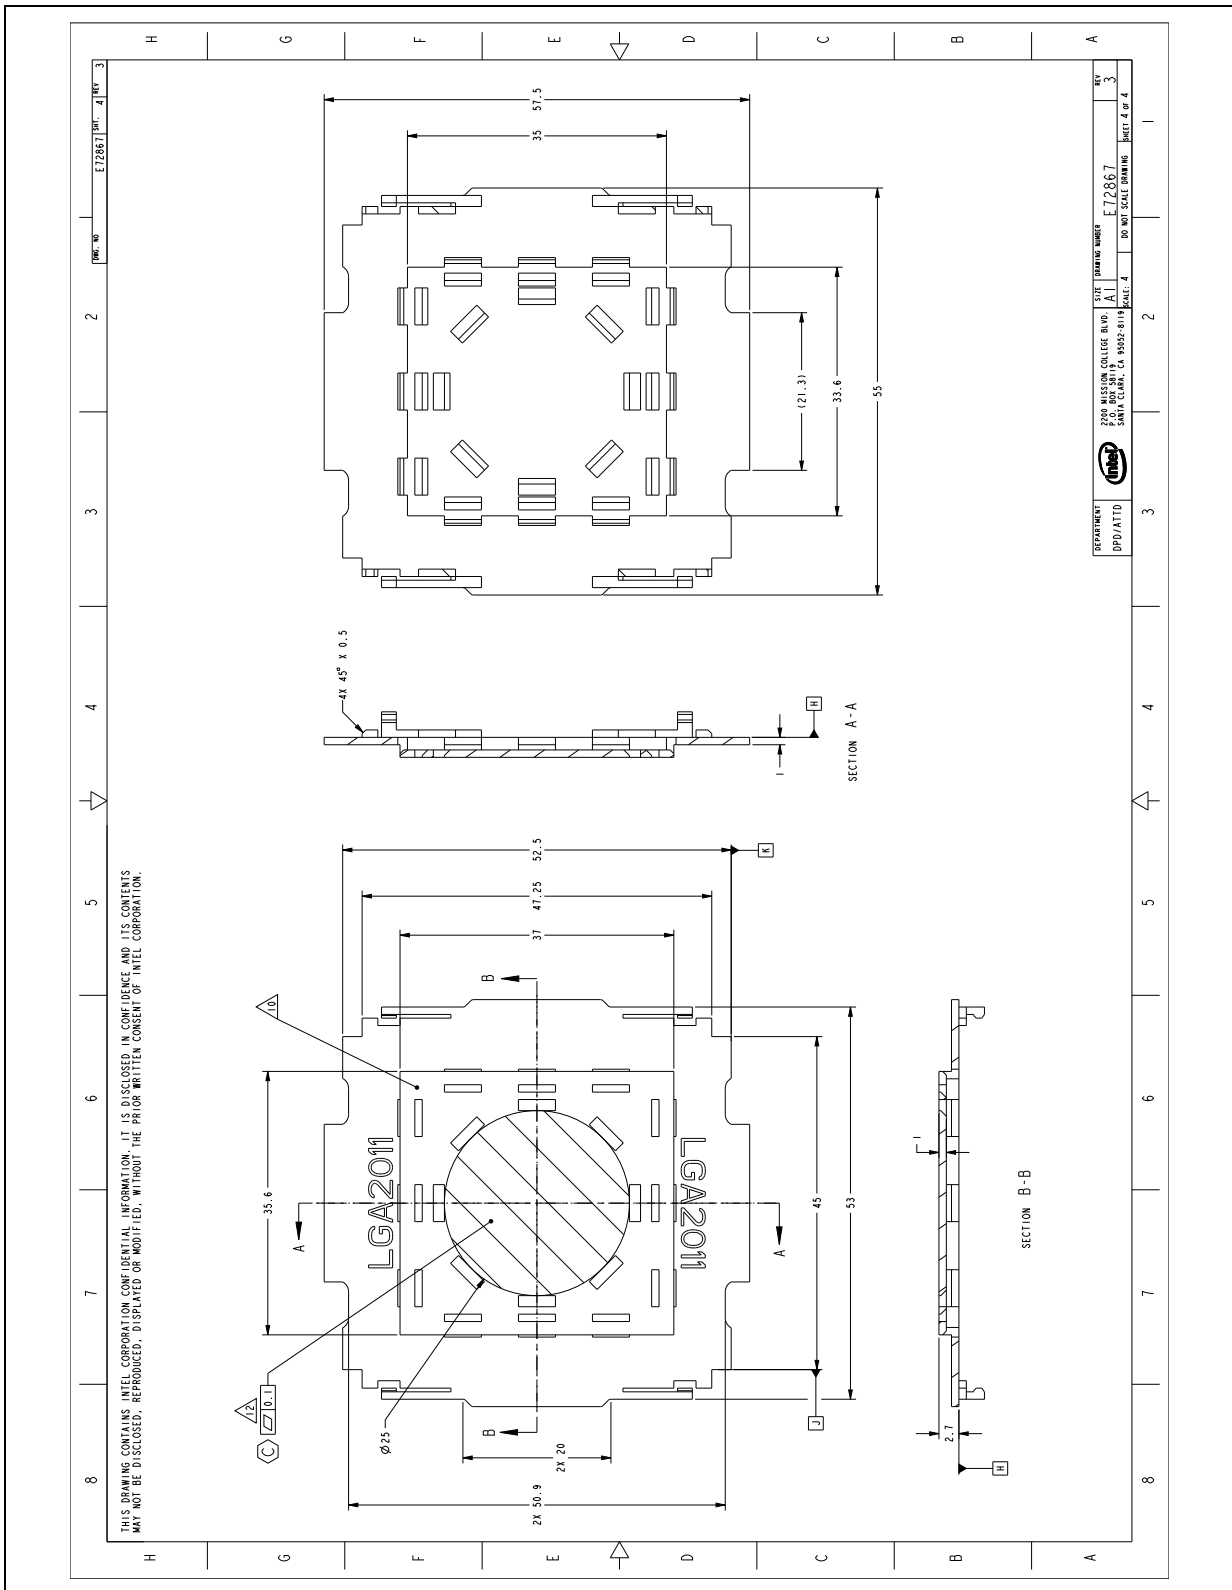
Socket Mechanical Drawing (Sheet 4 of 4)
